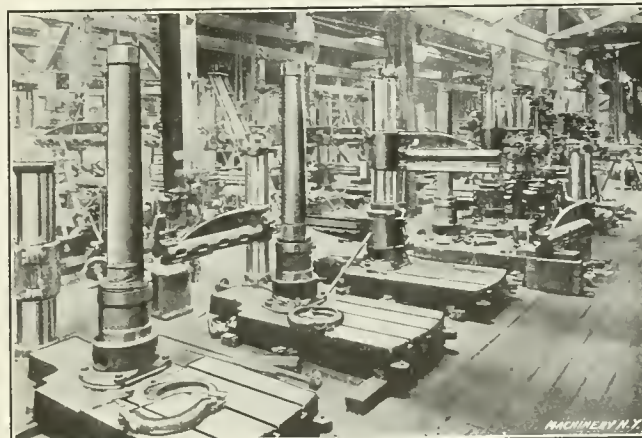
One Corner of Radial Drill Erecting Floor showing Partially Assembled Machines
